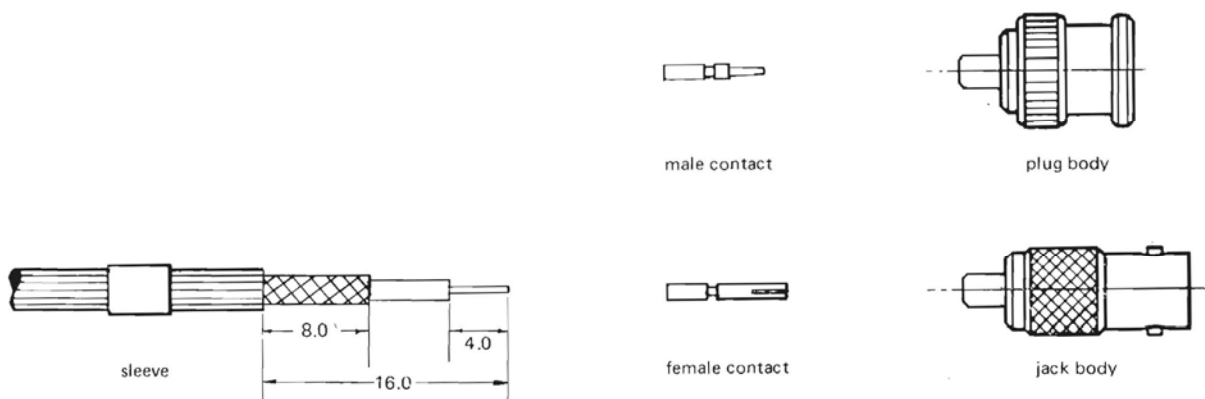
Plugs and jacks: captive crimp contact, pressure sleeve cable clamp
